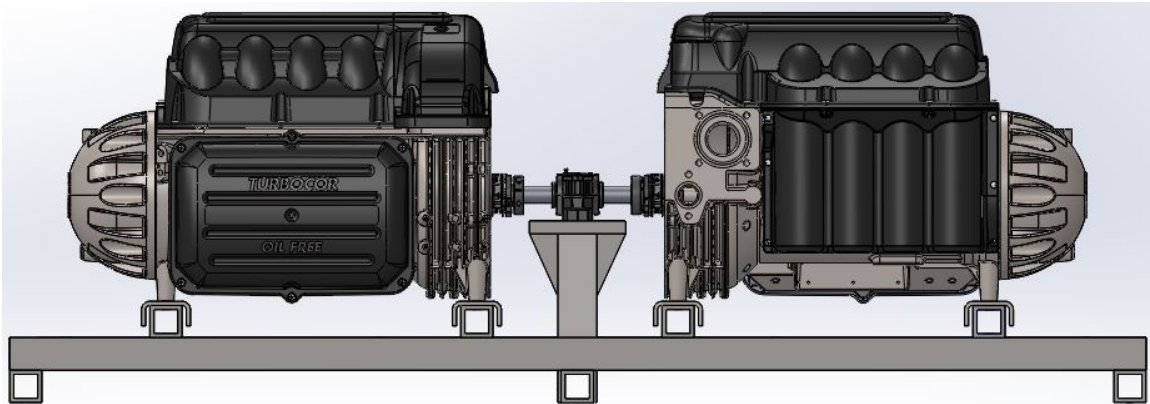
High Speed Motor Test Rig assembly with TT-500 compressors
